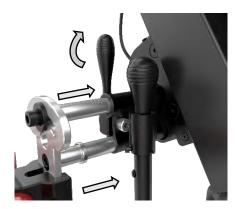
Assembling the Manual Clamp Assembly to the Width Adjustment Assembly
